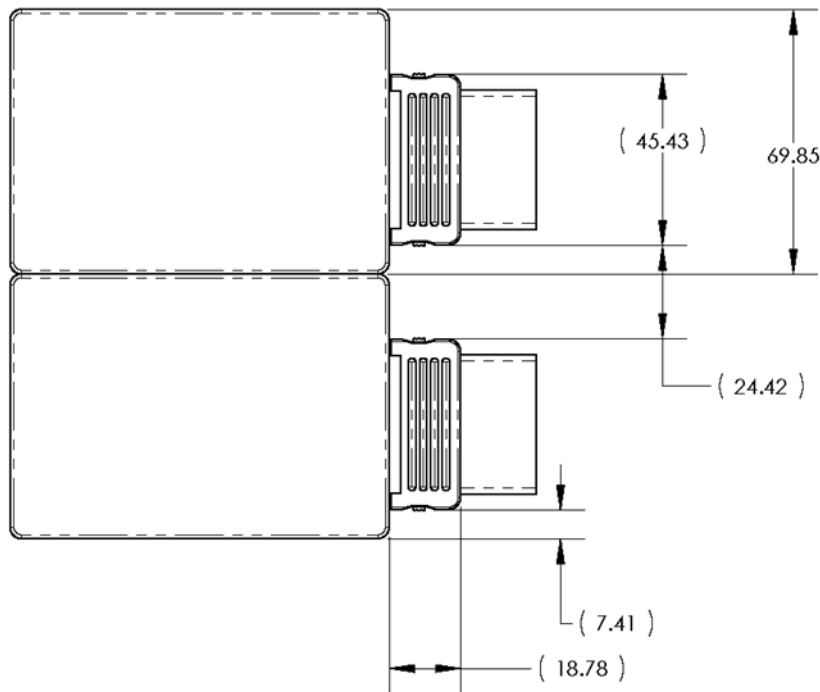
CABLE RETENTION: CABLE RELEASE CLEARANCE TOP VIEW
